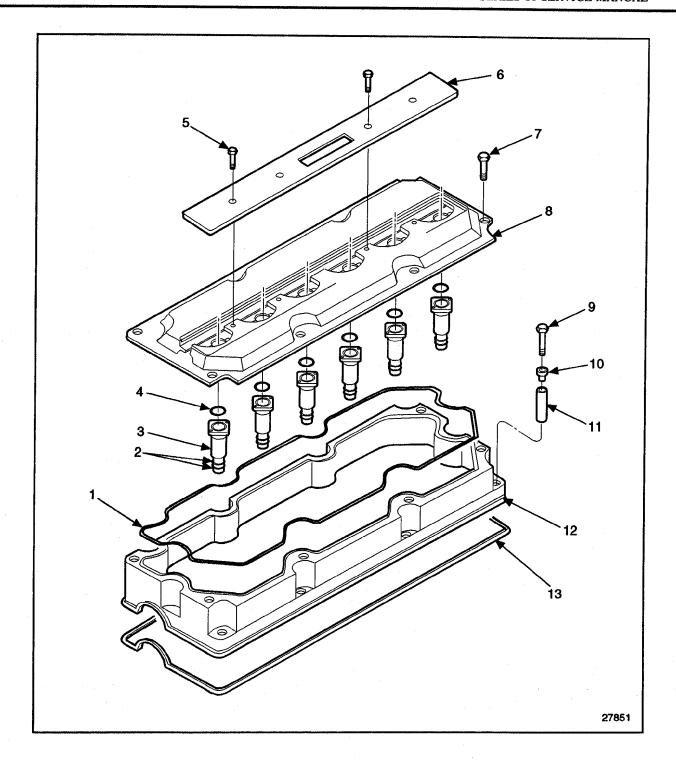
Two-piece Rocker Cover - Series 60 Diesel Engine
